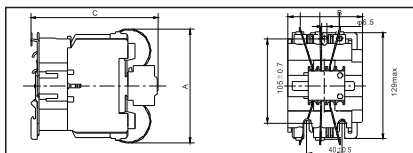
outline dimensions and installation of CJ19-63-95 contactor
